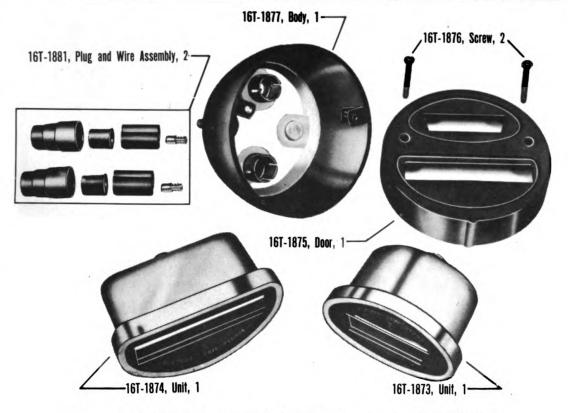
Blackout Stop and Blackout Tail Lamp Assembly 16T-1856
